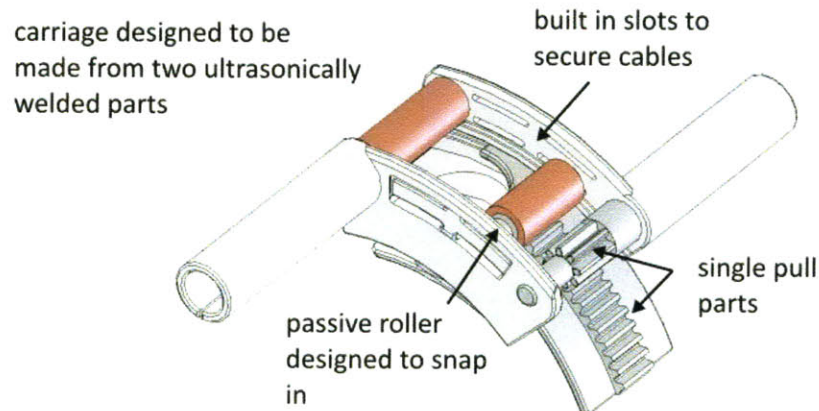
Features on carriage showing how it was designed for manufacturing with injection molding techniques.
